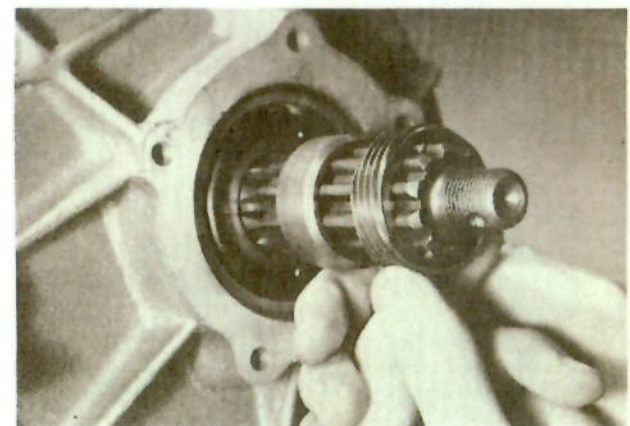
REMOVING THE SPEEDOMETER DRIVE GEAR AND THE SPACER FROM THE TRANSFER DRIVE SHAFT
